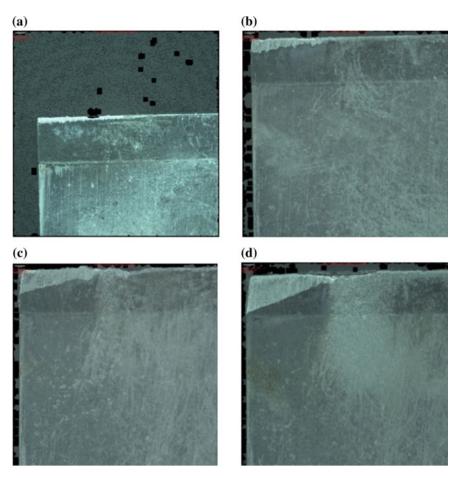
Intermittent images of flank wear on a PCD tool after machining of a 1 min, b 3 min, c 6 min, d 10 min
